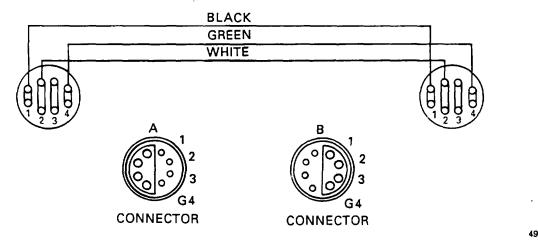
Cable Assembly CX-10951/G, drawing number SM-C-612898.
